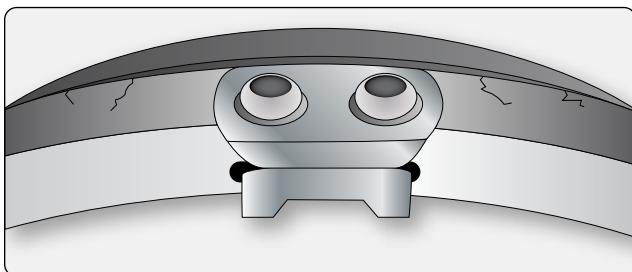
Inspection for cracks in the wheel disc drive key area is performed with dye penetrant on many wheels.
